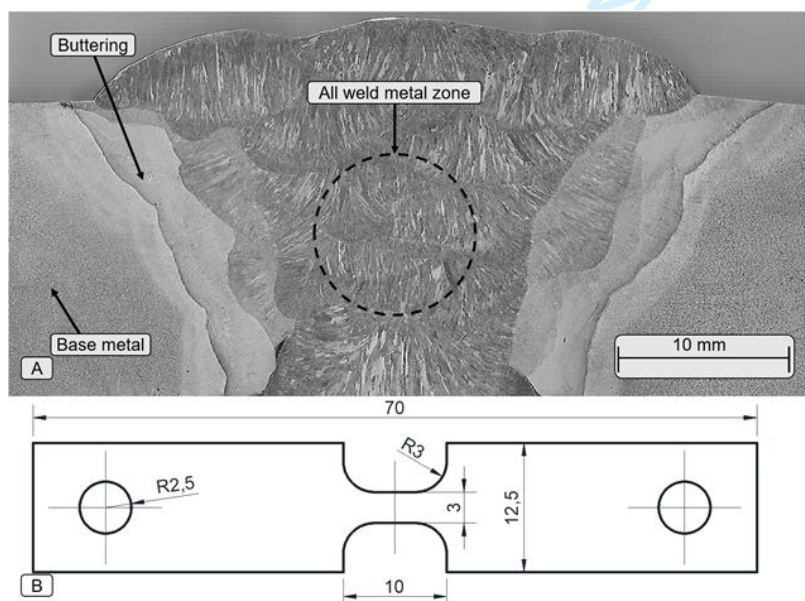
A: All weld metal coupon for SMSS; B: Geometry of the specimens for dilatometry tests, units in mm
